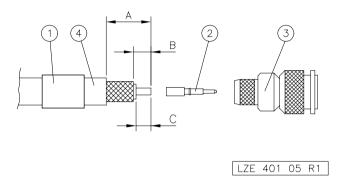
Connecting the antenna connector (Suhner 11 TNC-50-7-2c to the antenna Cable RG 214/U-60 + Sleeve Suhner 73Z-0-0-180), using the Suhner 76 Z-0-0-115 crimp tool kit.
